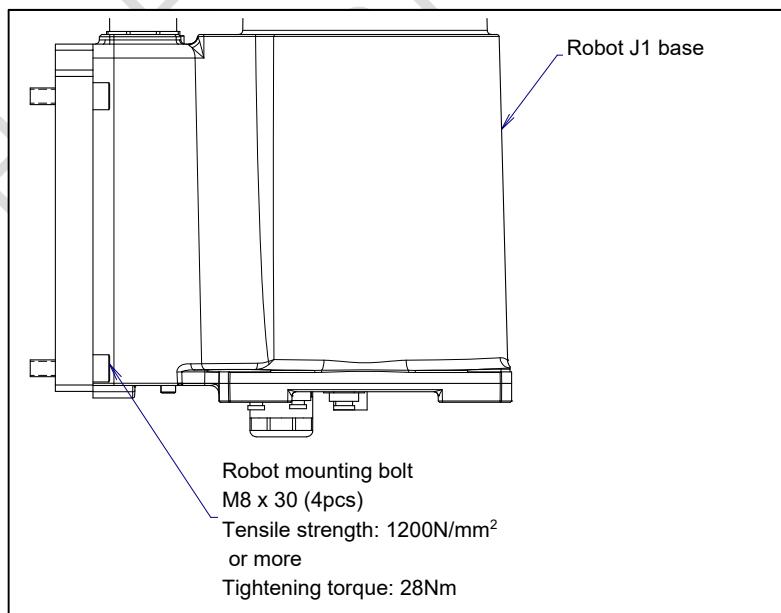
(c) Installation Example (wall mount) (SR-3iA, SR-3iA/H/C)
